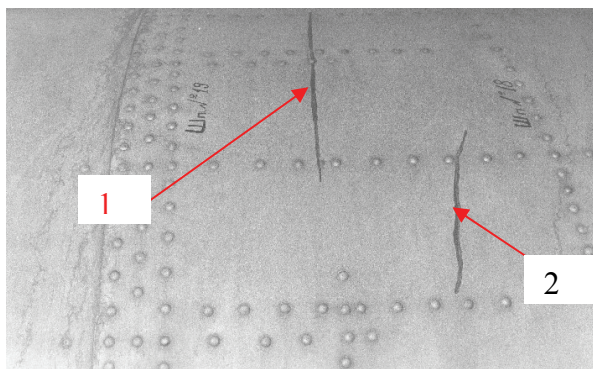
The fatigue cracks in a skin are initialized by the stress concentration 1) near the most loaded fastening point in rivet-joint 2) on small hole in skin
